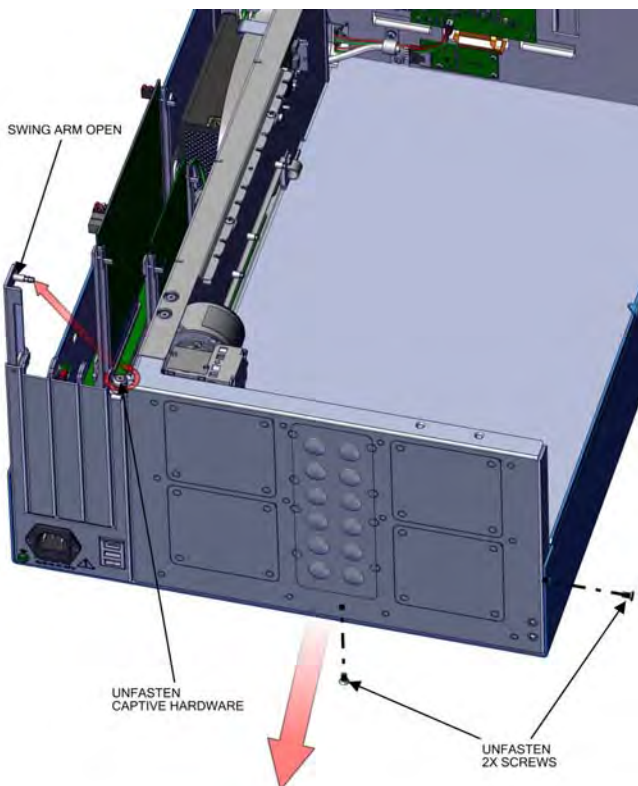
Unfasten Hardware Rear for Measurement Side Removal
